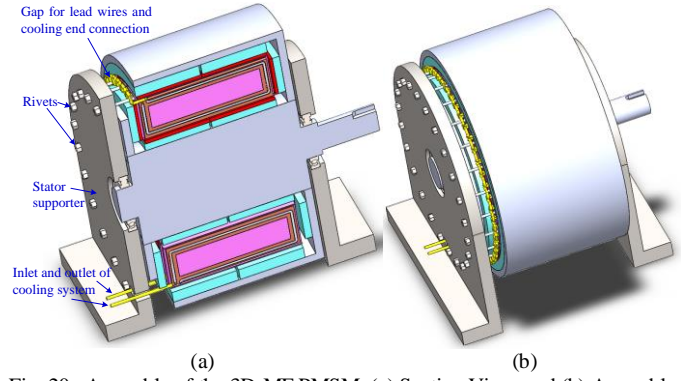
Assembly of the 3D-MF PMSM. (a) Section View, and (b) Assembly.
